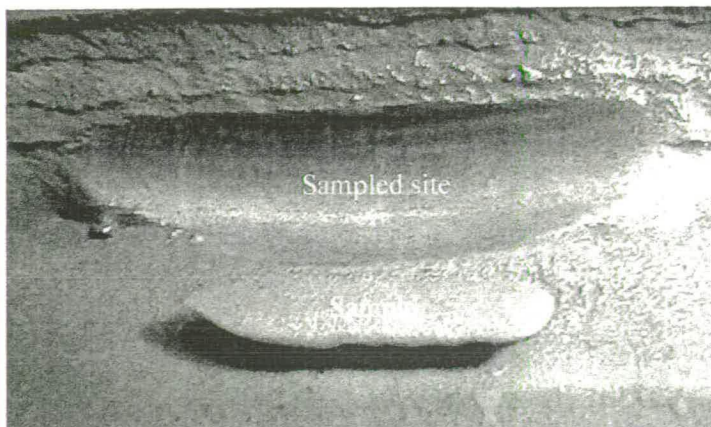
Removed sample and sampled site on T-section weld.
